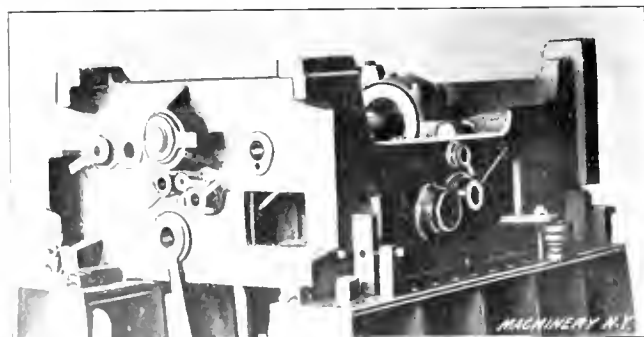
Combined Drilling and Boring Jig used with a Horizontal Drilling and Boring Machine.
